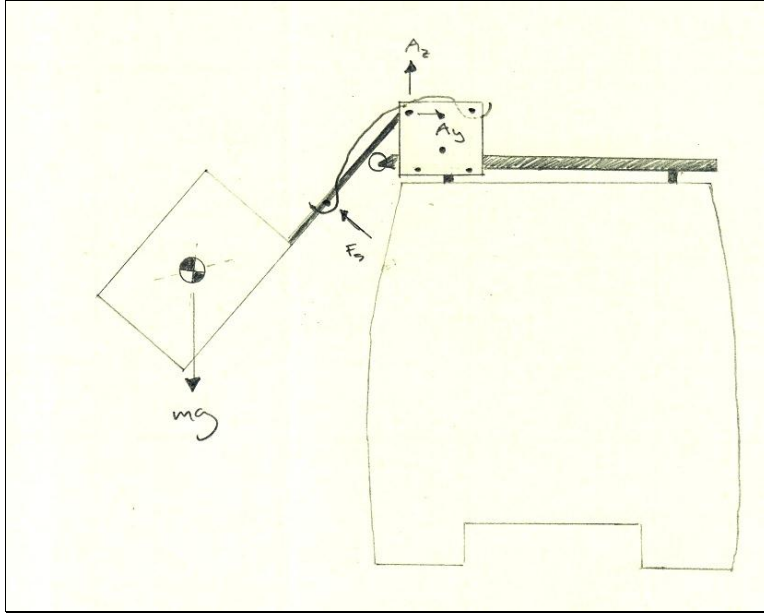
CONCEPT DRAWING OF THE SLIDING CANTILEVER.
